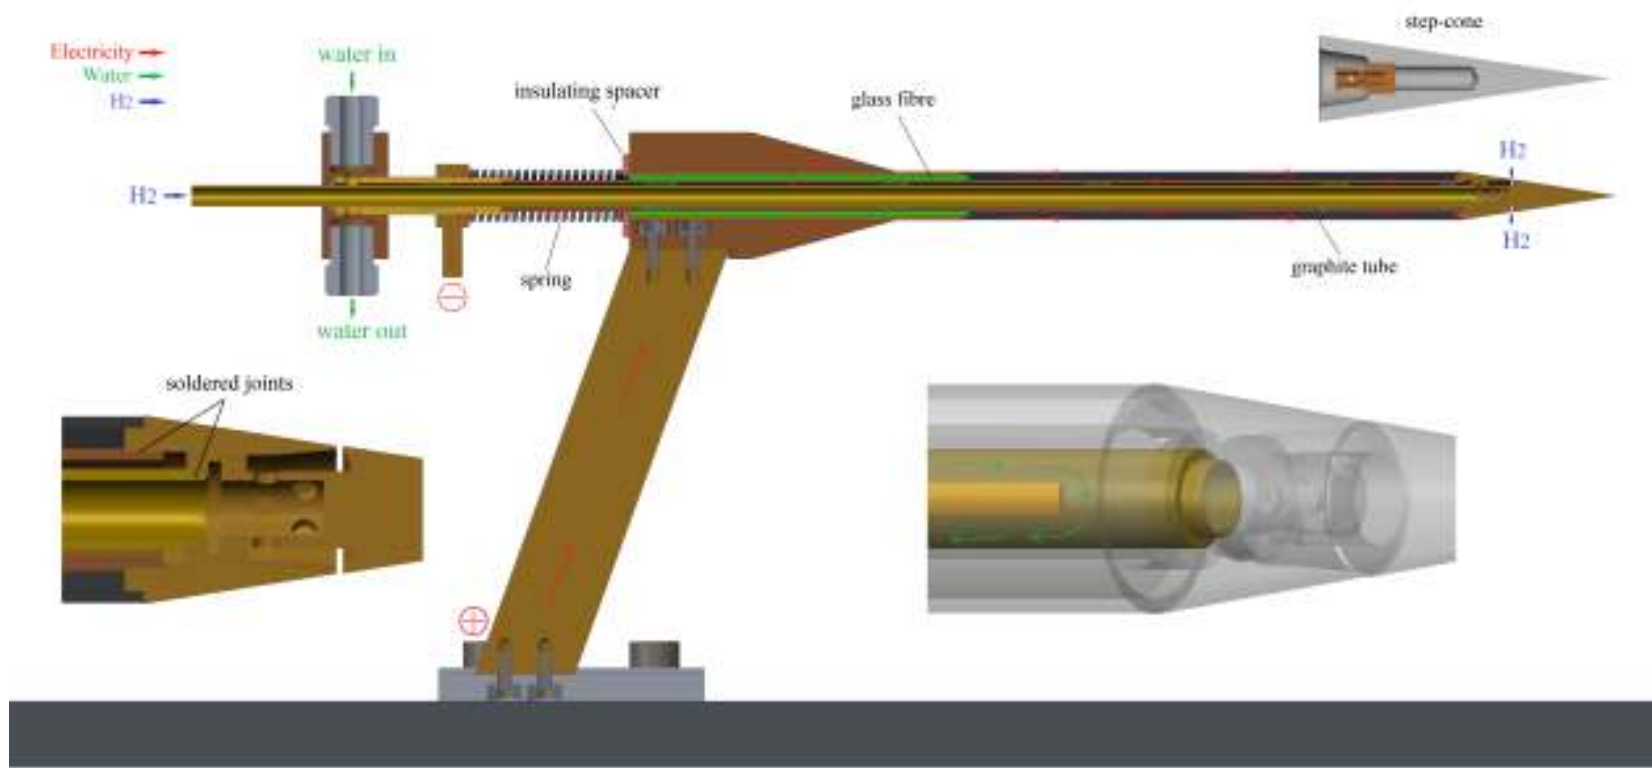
CAD views of hot surface model with nose-cone assembly.
